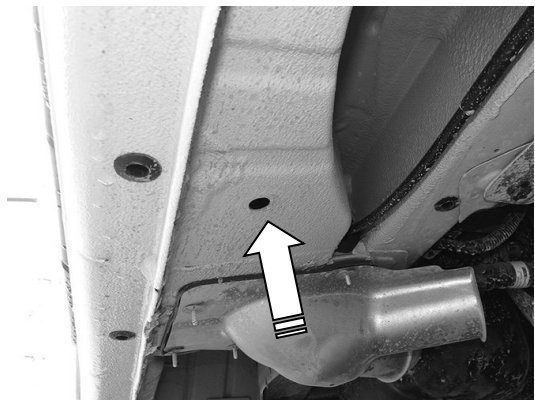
Driver Front Mounting Bracket (DFM) Installation
